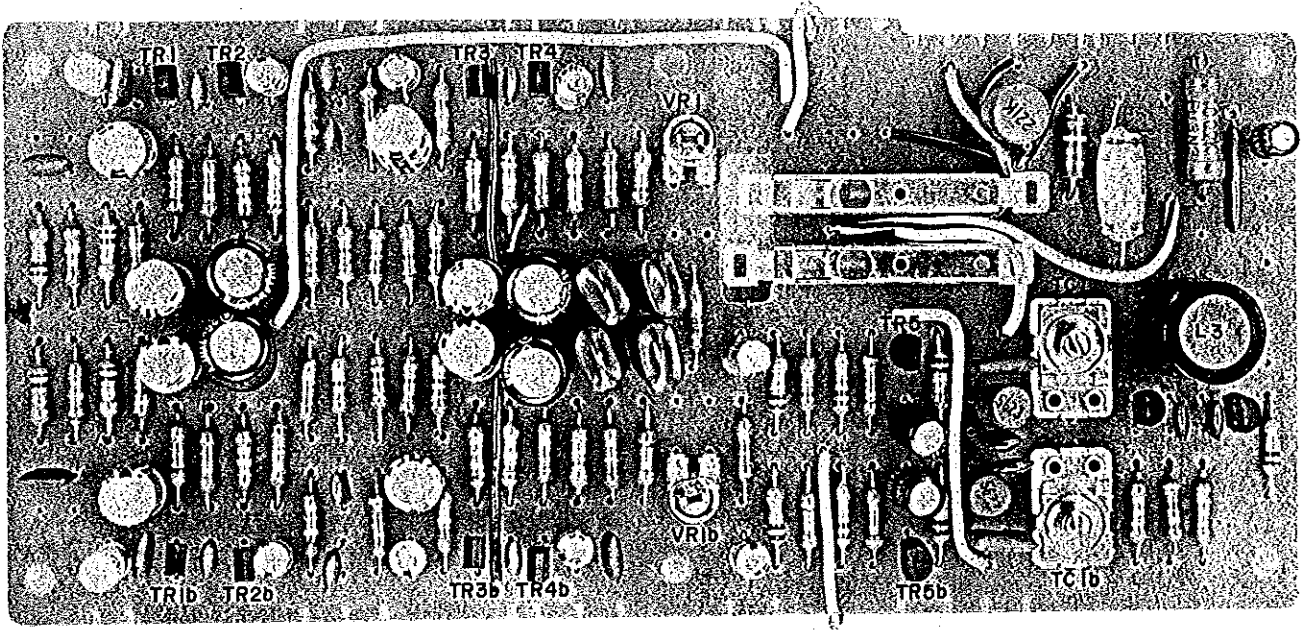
REC. AMP./OSC. P.C. BOARD TD-5003 (Front Side)
